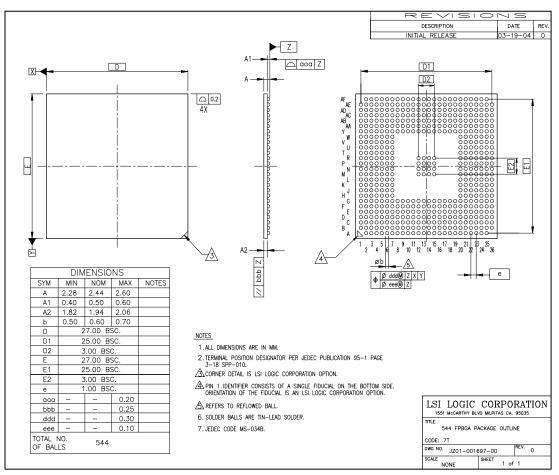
LSIFC949X 544-Pad FPBGA Mechanical Drawing
